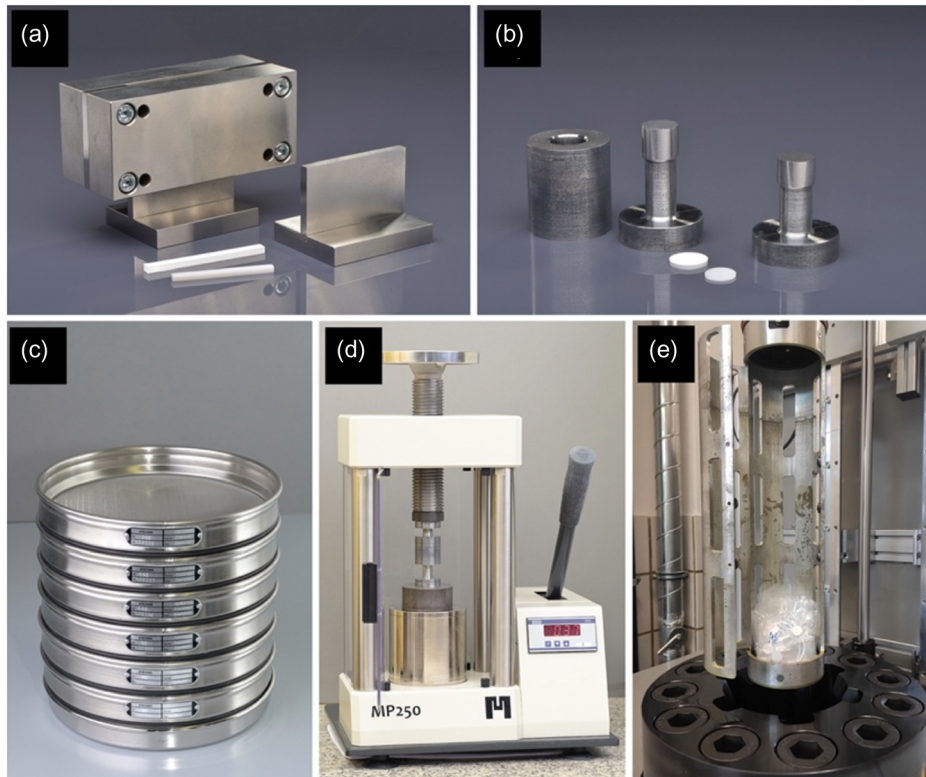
Images showing several steps of specimen fabrication procedures. a) Mold used to fabricate beams for uniaxial flexure; b) mold used for fabrication of discs intended for biaxial flexure; c) sieve system used to partition the powder fractions; d) manual press used for prepressing of specimen in the molds; and e) cold-isostatic pressing conducted after the prepressing.
